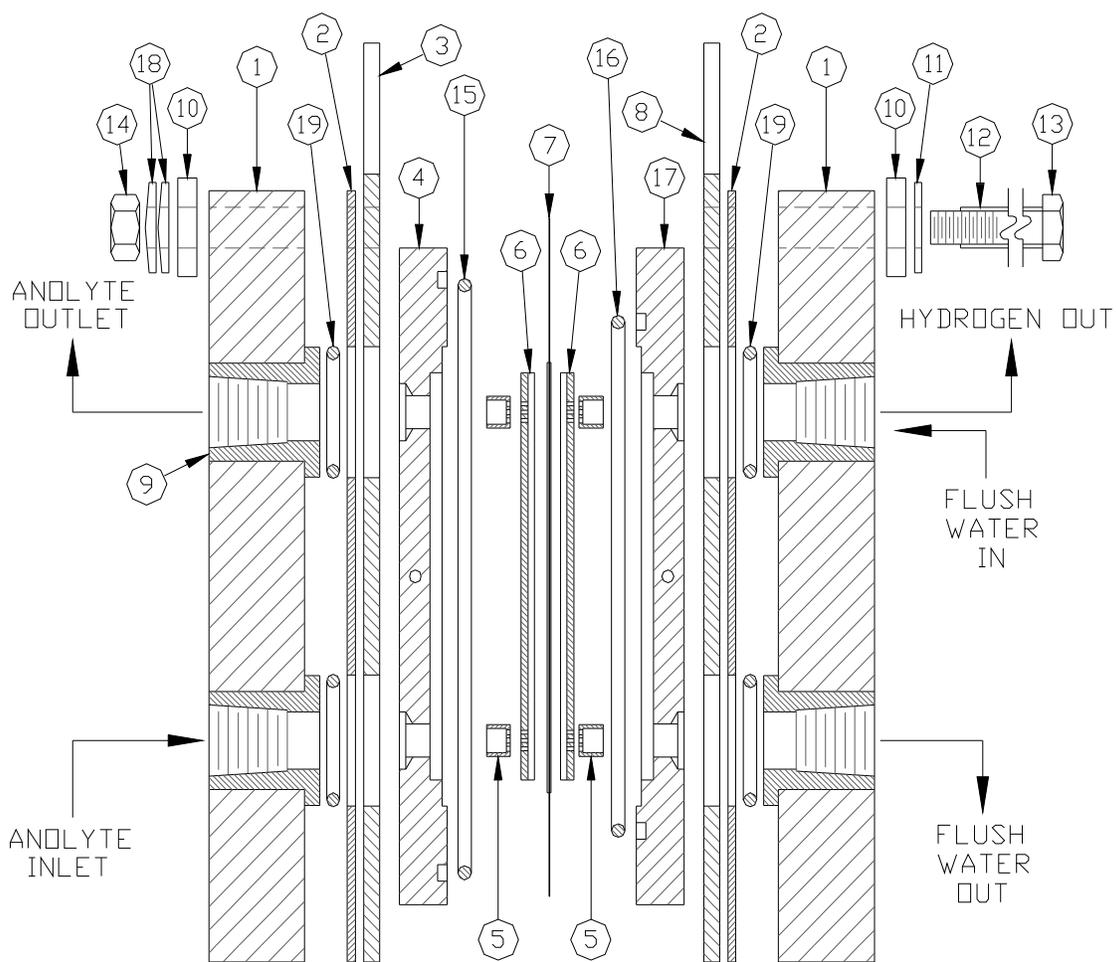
Exploded Section A-A View of SRNL Pressurized Single Cell Electrolyzer
